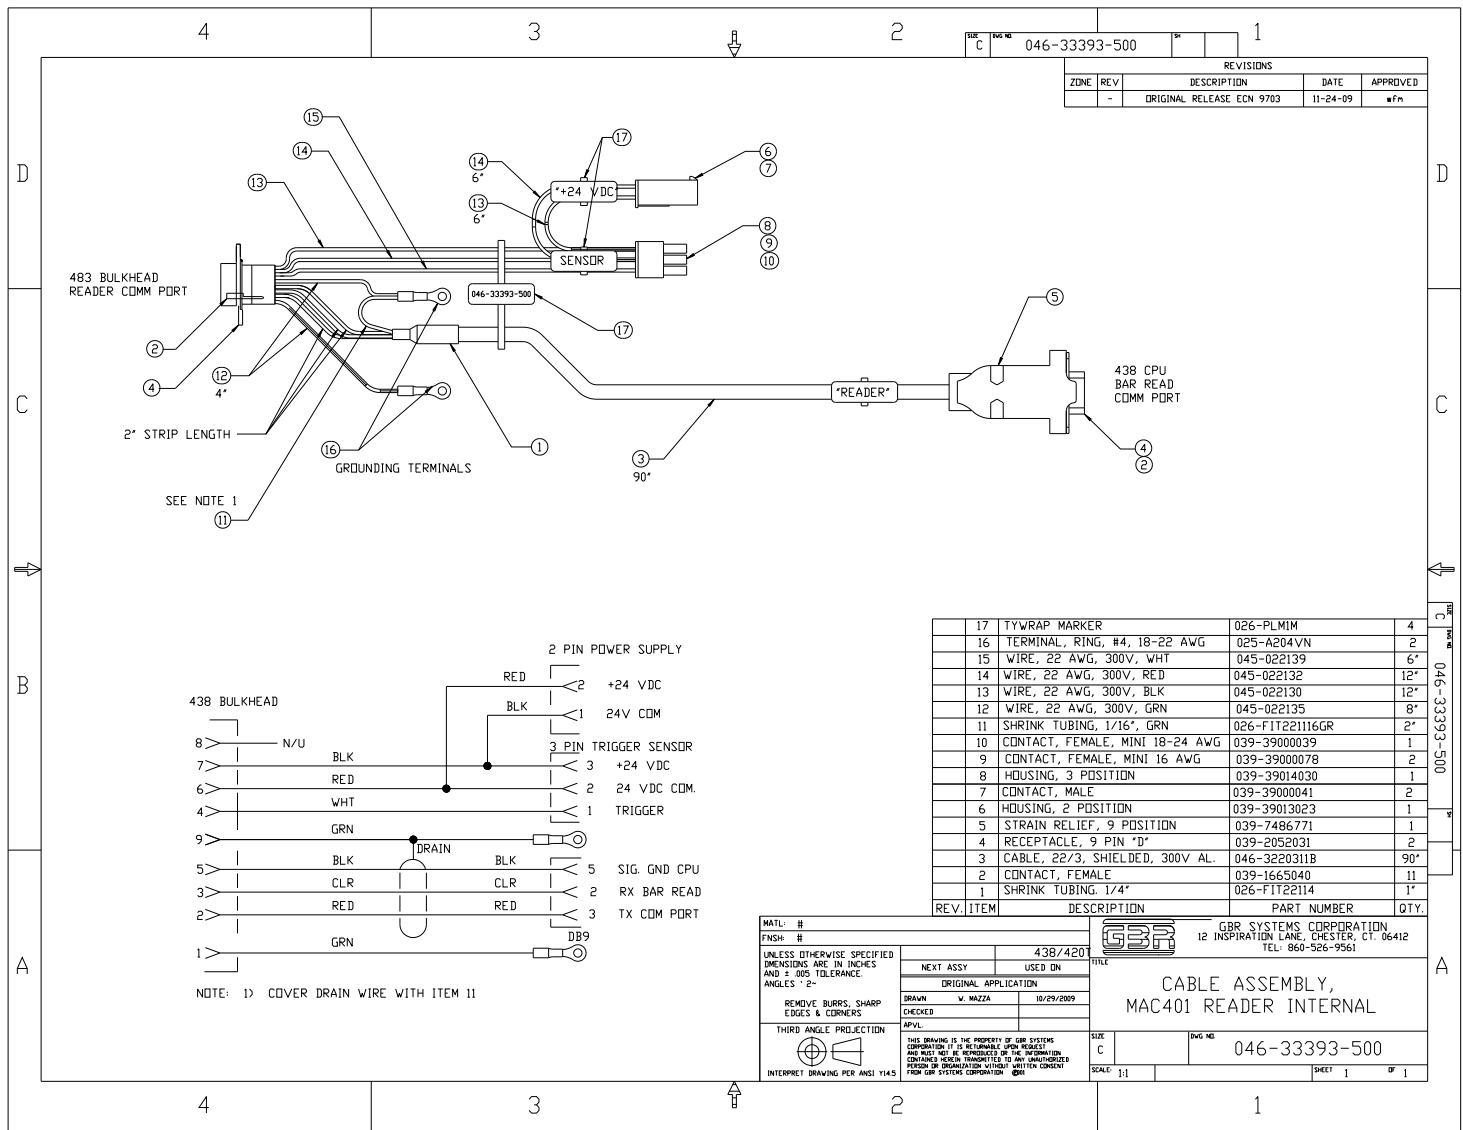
046-33393-500 - Cable Assembly MAC401 Reader, Internal
